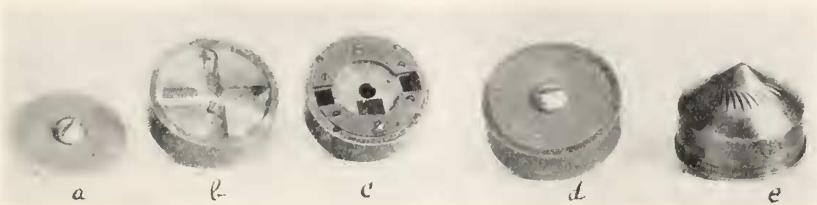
Rotors for air turbine. (a) cover for tube type; (b) tube type rotor showing grooves for centrifuge tubes; (c) rotor for microscope observation; (d) tube type rotor with cover on; (e) bottom of rotor showing flutings.
